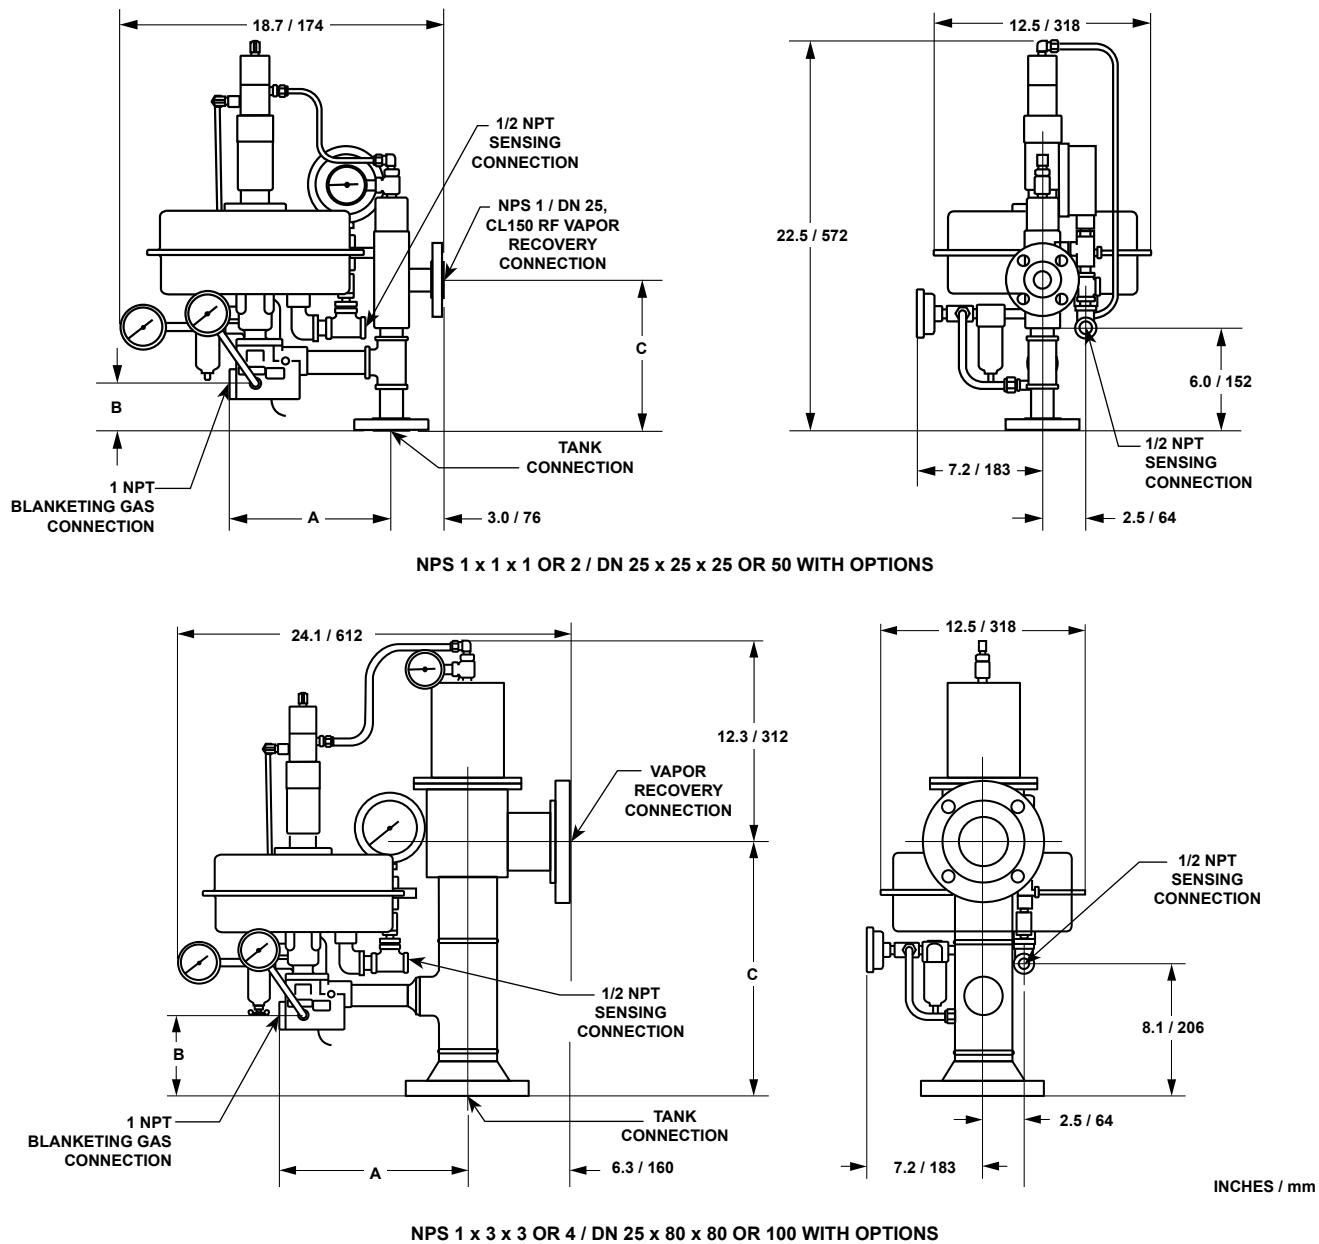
Type ACE97 Pad/Depad Valve Dimensions
